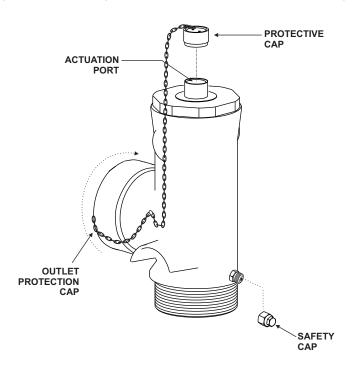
1½ in. and 2 in. Valve General Arrangement (P/Ns 45-140000-001 and 45-150000-001 Respectively)
